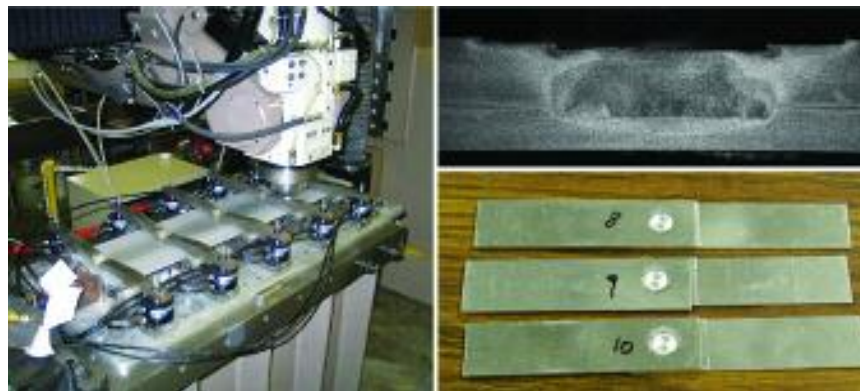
Refill friction spot welding (RFSW) using MTS ISTIR 10 system and custom designed head adapter (left). RFSW lap shear coupons (right, bottom), and metallurgical cross section of RFSW showing complete joint penetration in 0.080-in.-thick 7075-T73 aluminum (right, top) (Arbegast, 2006).
